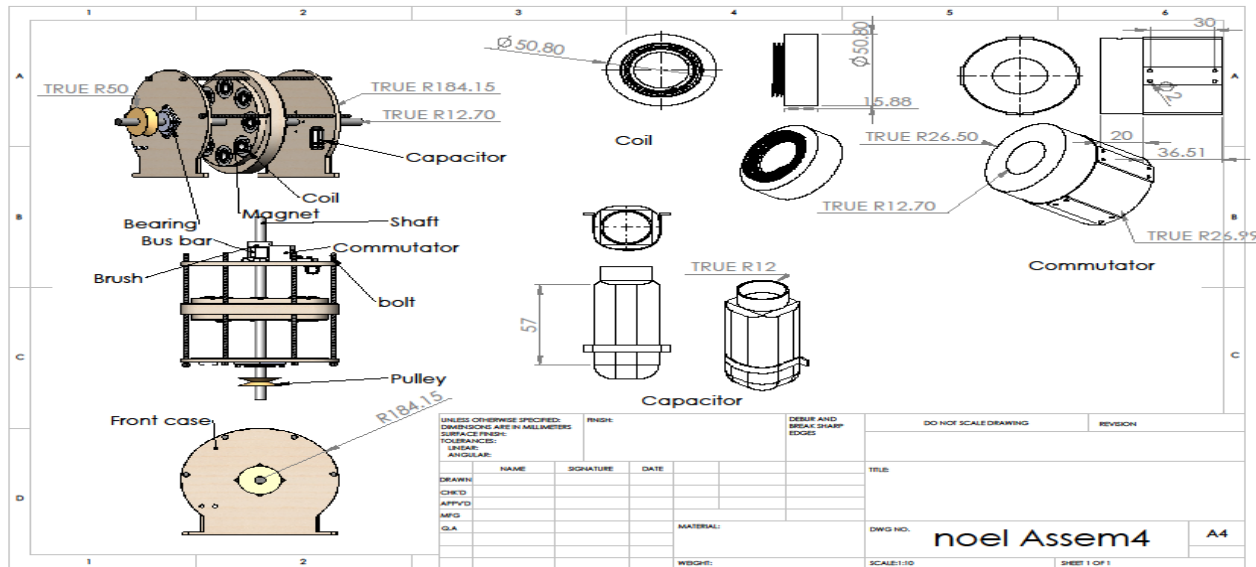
Labelled component assembly drawing of a Fuel-less Generator
